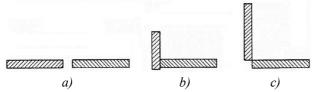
Schematic presentation of the welded joint: a) butt, b) corner and c) corner-edge
